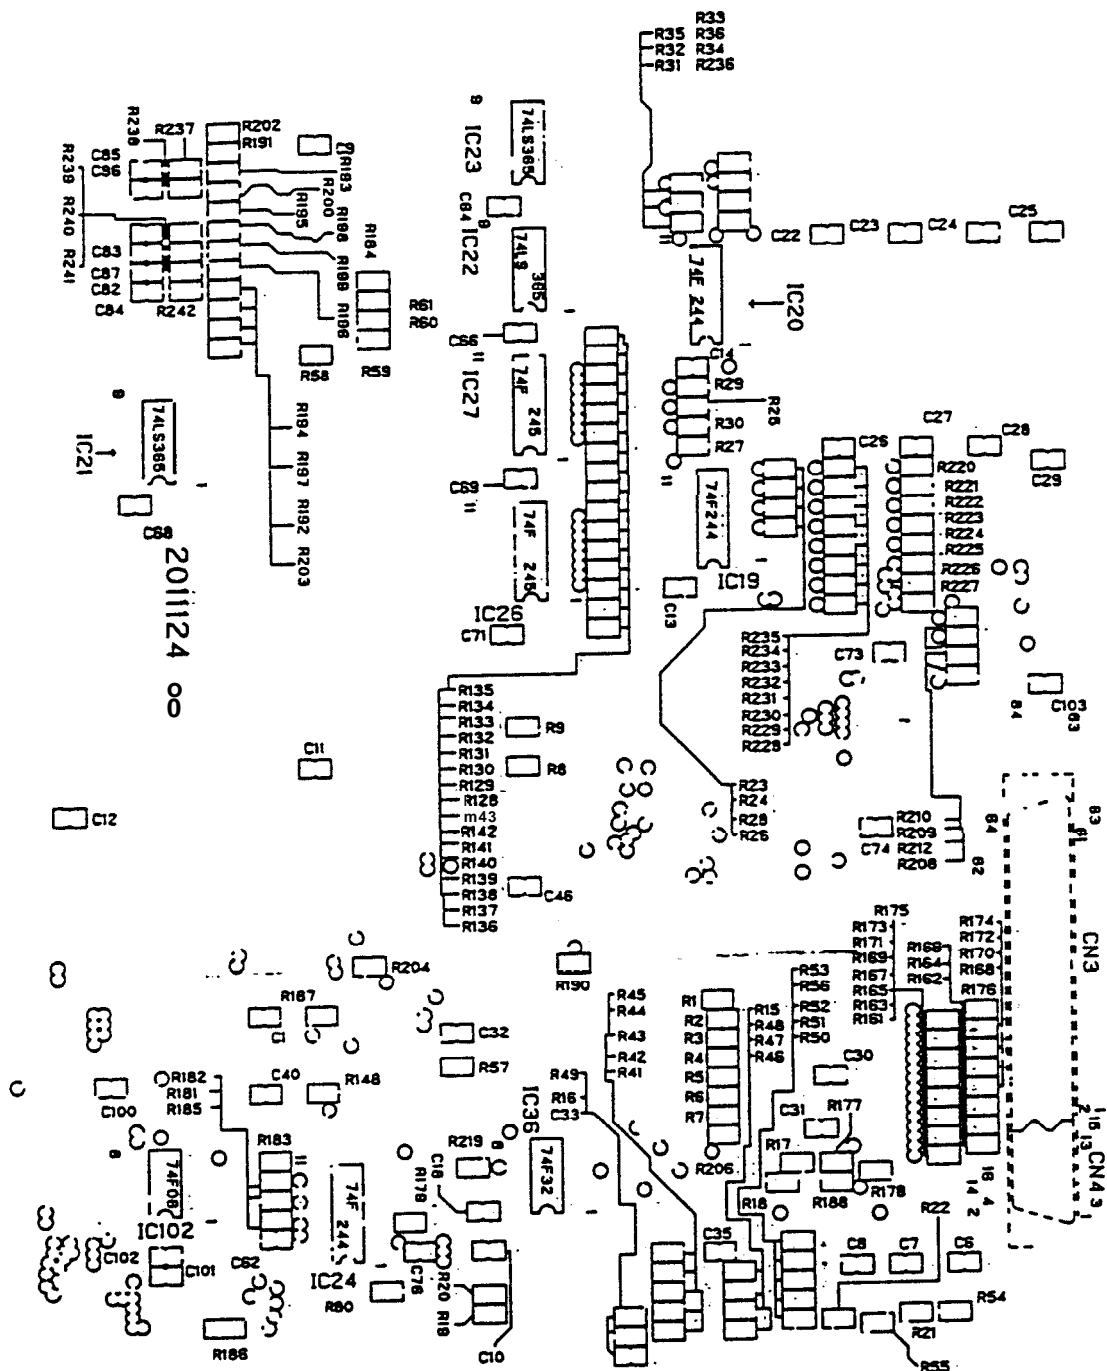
CI08 MAIN-B Board Component Layout (Back)
